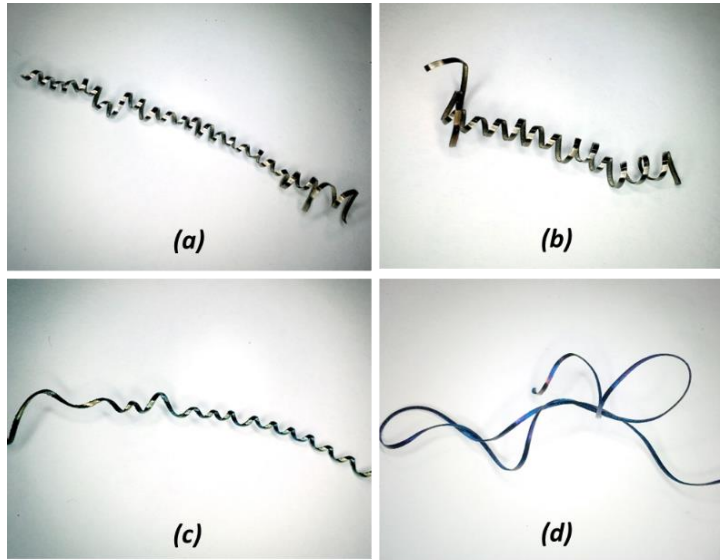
Chips removed from the workpiece: (a) 5th cut (break-in), (b) 15th cut (steady wear I), (c) 25th cut (steady wear II), and (d) 32nd cut (failure wear)
